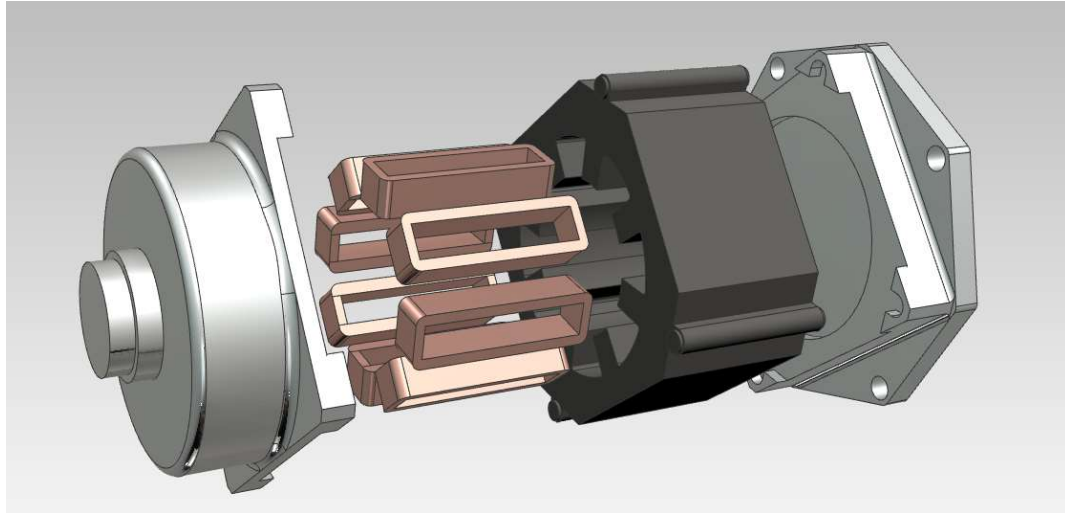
Stator-housing assembly CAD model for the 8/6 SRM
